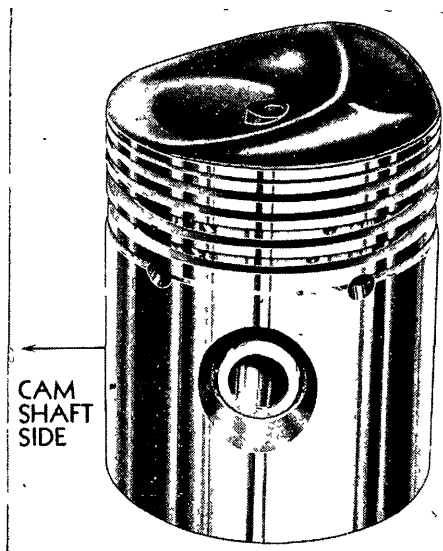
On 1939-52 models, assemble rod and piston so that oil hole in rod and hollowed side of piston head faces camshaft when installed
